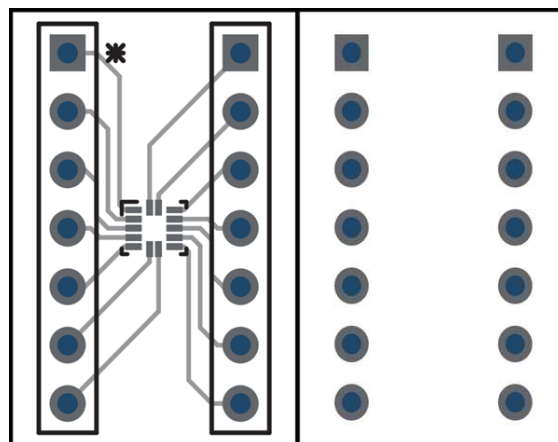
RUC package top layer (left) and bottom layer (right) PCB layout
